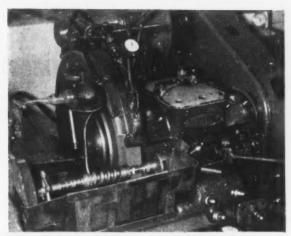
Ends of the cam are ground on this Norton machine. The work piece is shifted end for end between the first and second passes. A stepped wheel is used.
